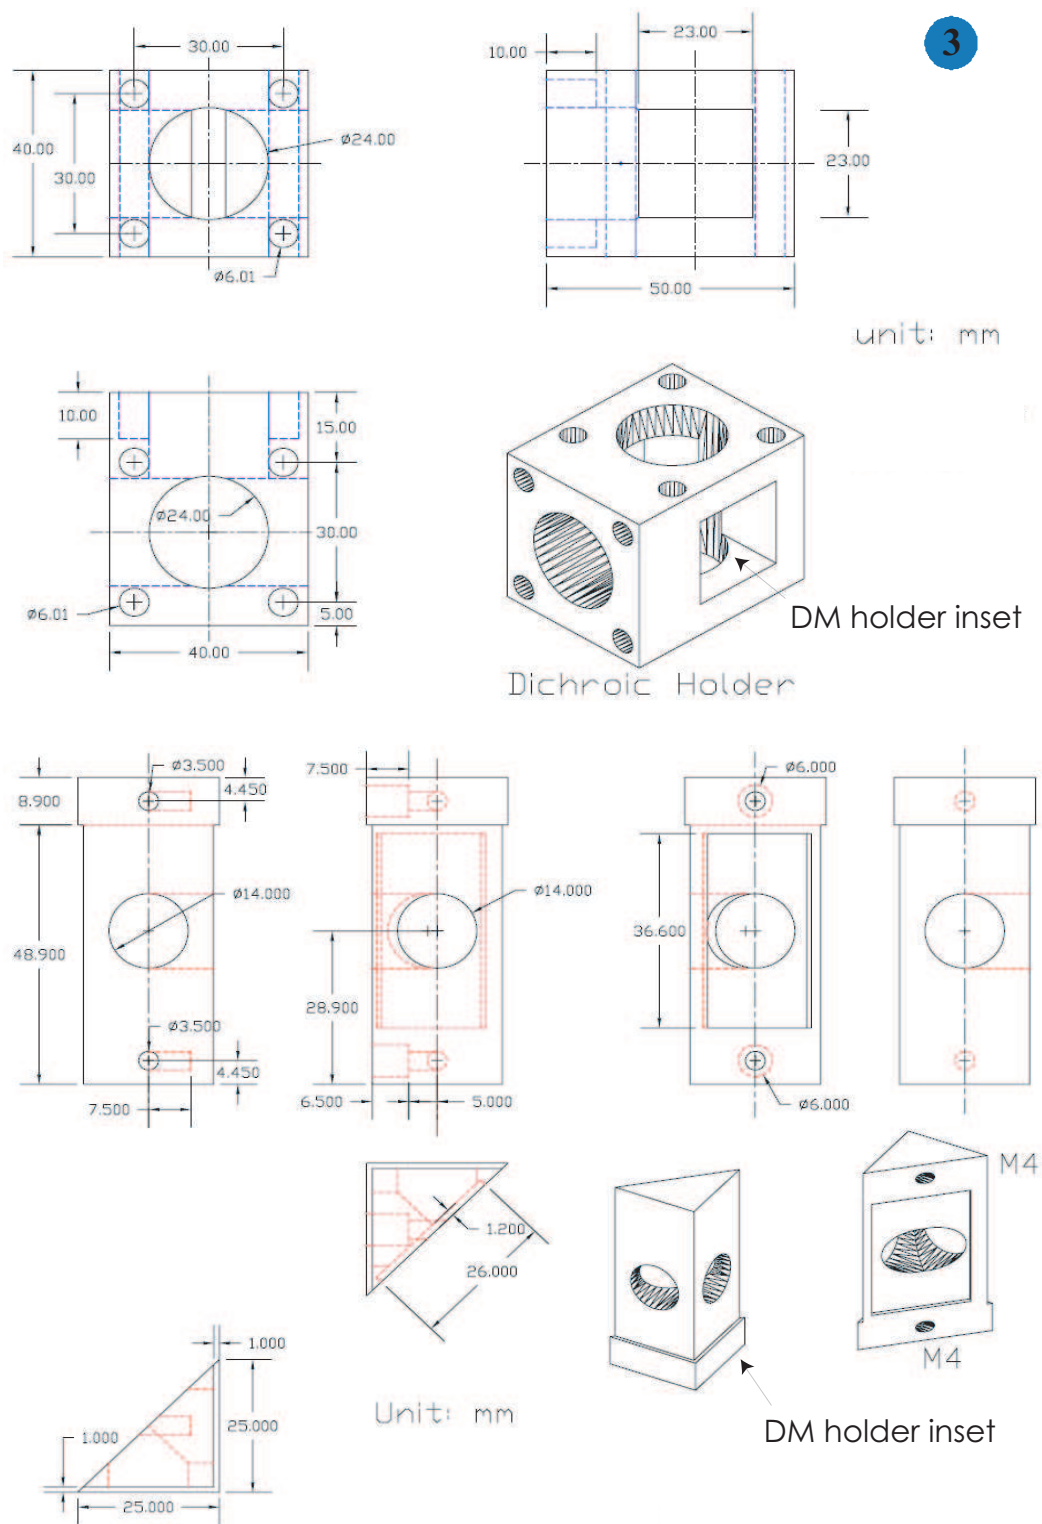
Technical drawing of dichroic mirror holder and its inset
